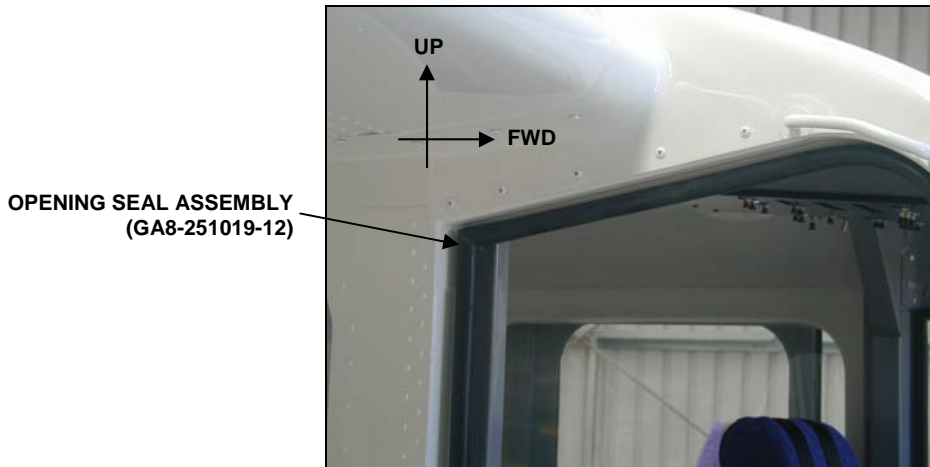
New seals installed in the upper section of the door opening (right hand side shown).
